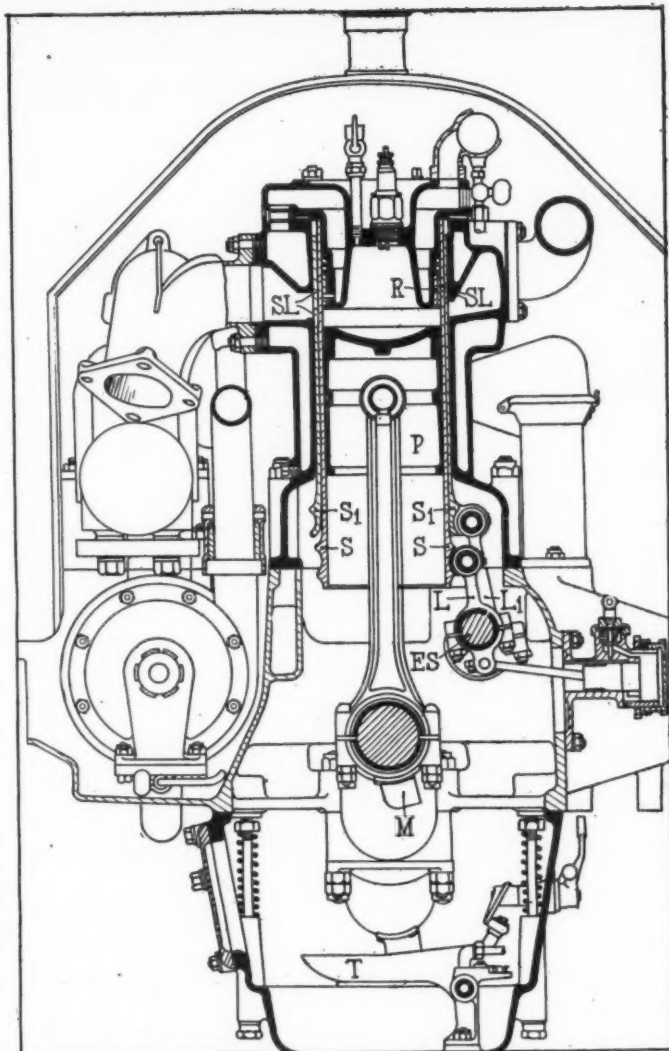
Cross-sectional view of Stearns-Knight motor, illustrating sleeve construction and design of oiling system
